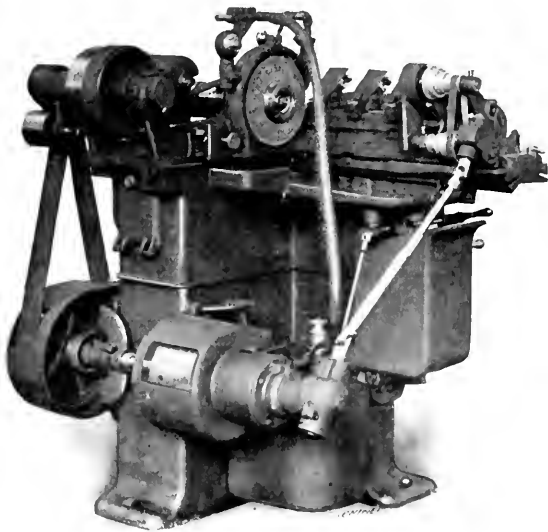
Rear View of Grinding Machine shown in Fig. 1
